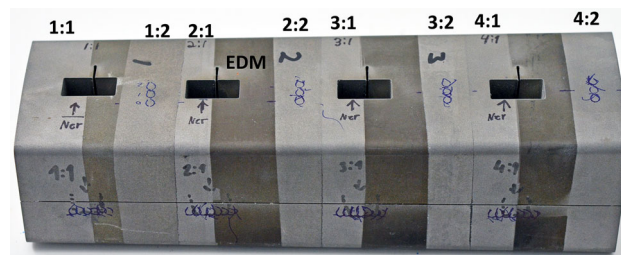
Overview of the test sample, Inconel 718 shaft, showing the different grit-blasting positions
